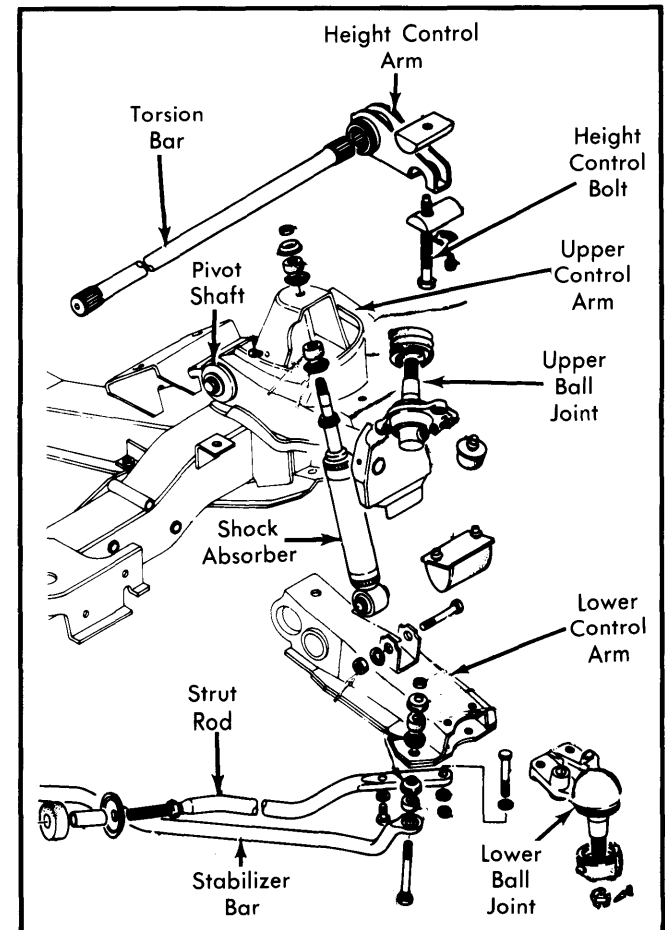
Exploded View of Front Suspension (2-WD Shown, 4-W Similar)
